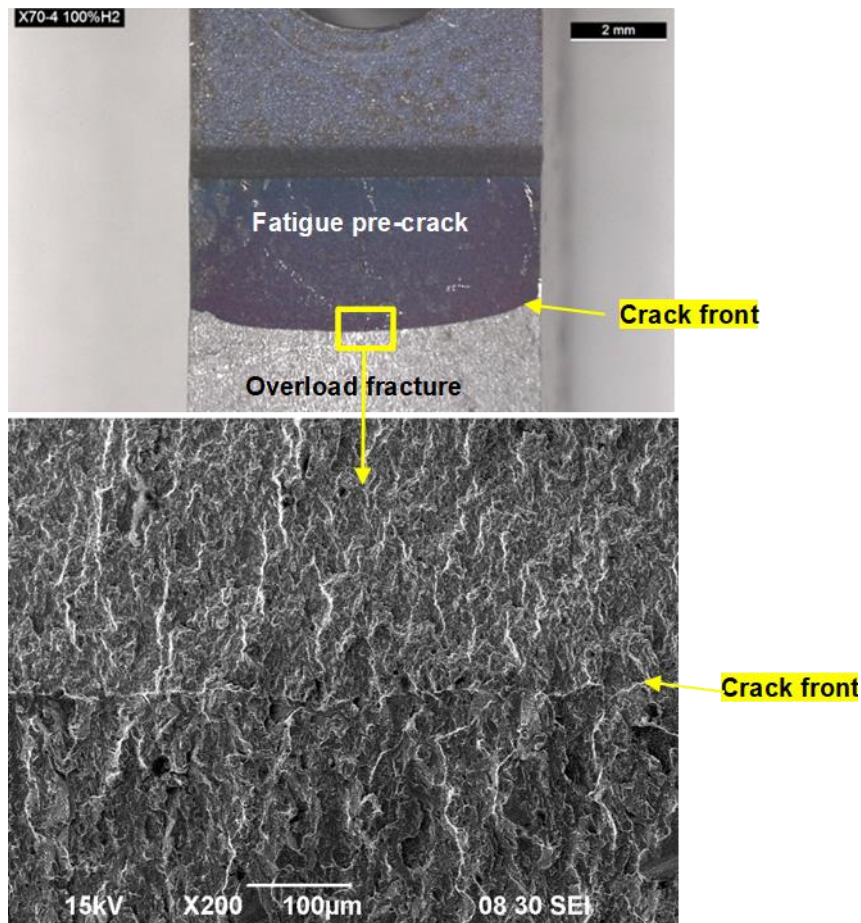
Heat tinted fracture surface of X70 CT-WOL specimens after 100 mol% H₂ exposure and SEM micrograph showing detail of the fatigue pre-crack surface and crack advancing front
